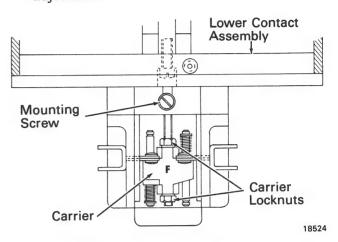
Bottom-Mounted Coil Contactor Interlock Assembly
